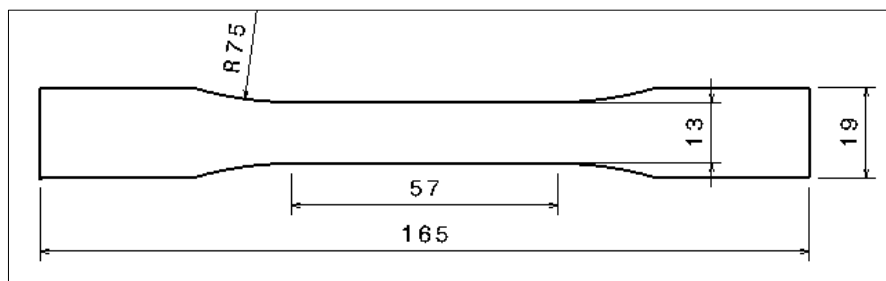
Specimens dimensions according to ASTM D638-14 Type I for Tensile Tests [14]
